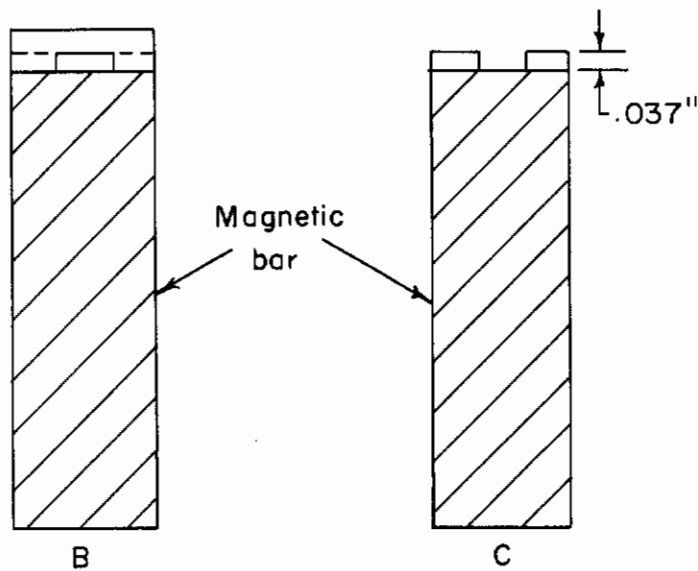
DIMENSIONAL LINE DRAWING OF BRASS SUBASSEMBLY AND STEPS IN ATTACHMENT TO THE MAGNETIC BAR
